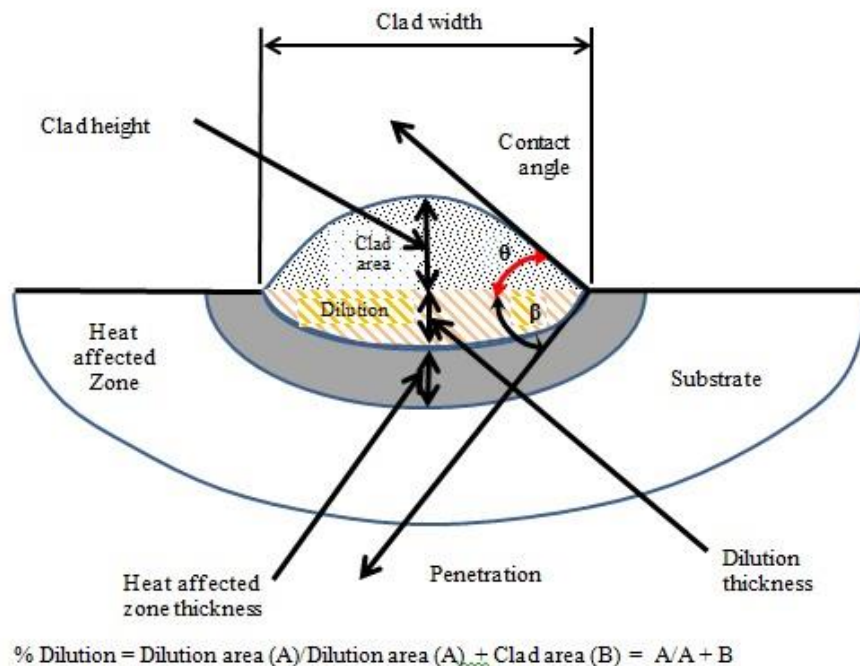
Weld Clad Geometry (Sayyid et al., 2017)
